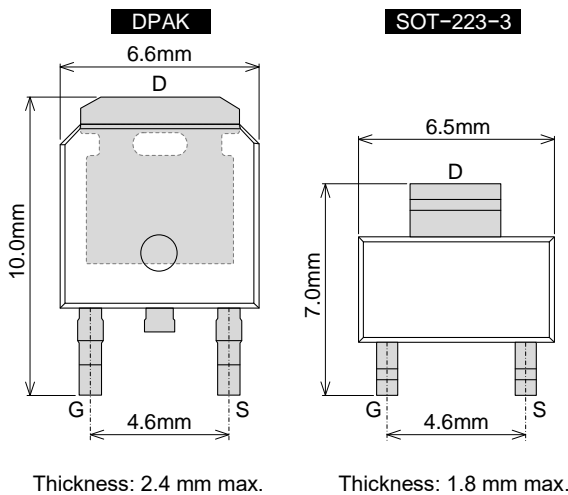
Outline drawings of DPAK and the SOT-223-3 package
